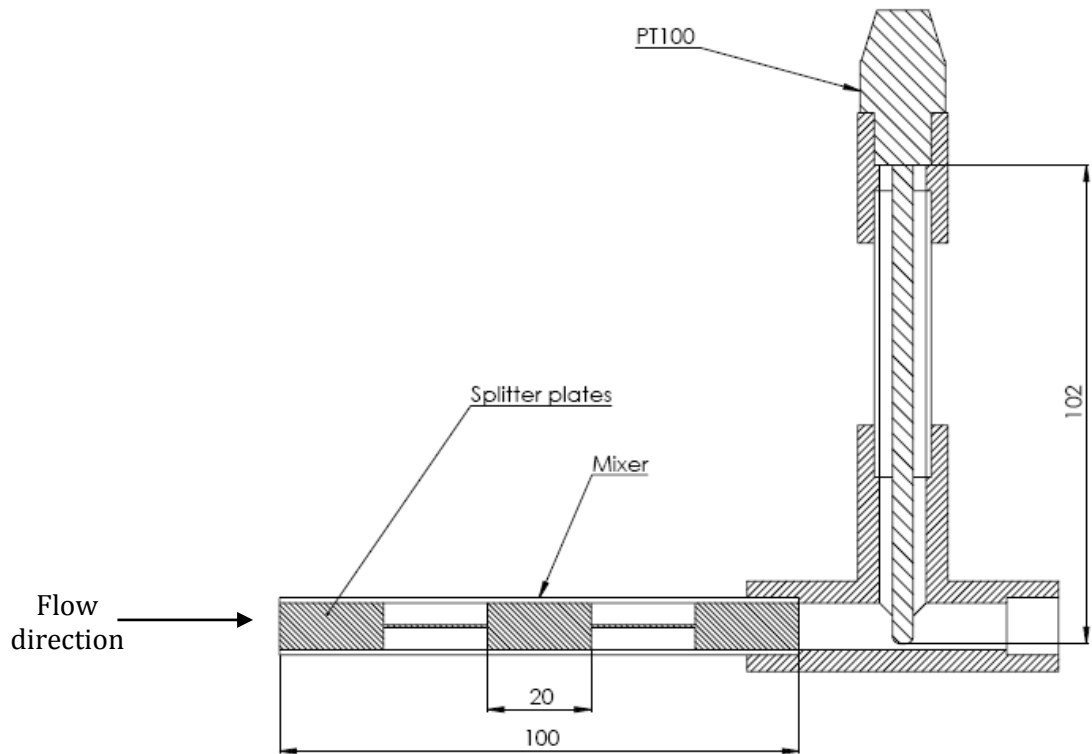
Mixer section with PT100 thermocouple attachment to measure the bulk fluid temperature downstream of each test tube. All dimensions are in mm.
